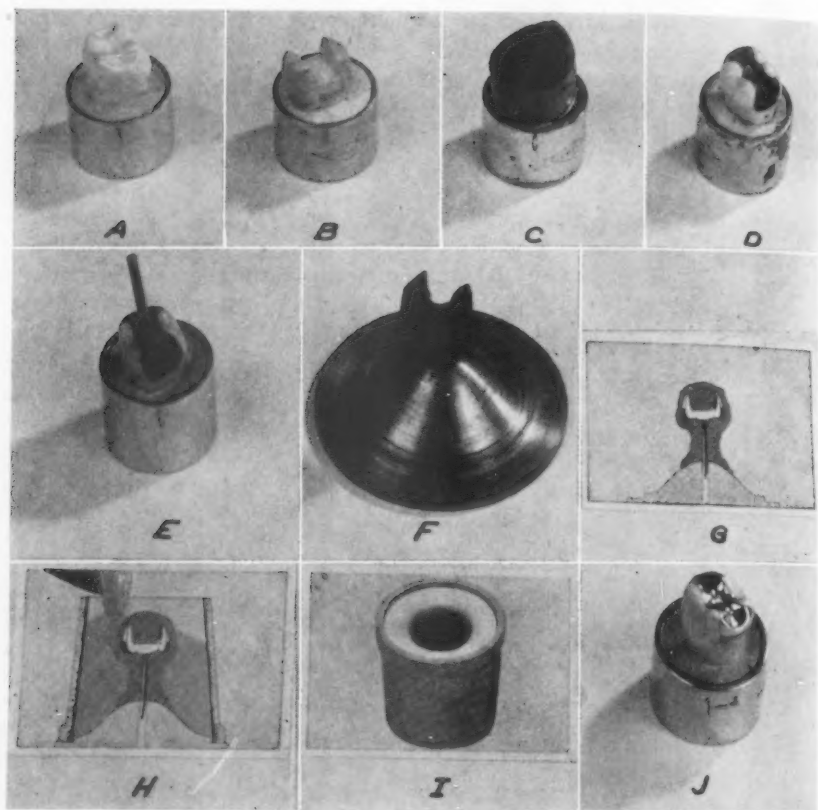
DENTAL TECHNIC FOR CASTING INLAYS. A—TOOTH IN NORMAL HEALTHY CONDITION. B—DECAYED TOOTH WITH ADJACENT TOOTH STRUCTURE REMOVED TO PROVIDE CAVITY CAPABLE OF HOLDING INLAY. C—COPPER BAND, CONTOURED TO FIT TOOTH SNUGLY, IS FILLED WITH SOFTENED INLAY WAX, PUSHED ONTO THE TOOTH AND HELD UNDER FINGER PRESSURE UNTIL THE WAX COOLS AND HARDENS. D—COPPER BAND IS SLIT AND REMOVED AND THE WAX IS CARVED UNTIL THE REMAINDER RESEMBLES ORIGINAL TOOTH STRUCTURE. E—WIRE OR PIN (SUCH AS 14 GAGE) IS HEATED AT ONE END AND INSERTED INTO PATTERN. AS THE PIN COOLS THE SURROUNDING WAX HARDENS AND HOLDS IT SECURELY. F—PATTERN IS LIFTED OFF THE TOOTH, USING THE PIN AS A HANDLE. IT IS INVERTED AND SET IN THE CRUCIBLE FORMER. G—PATTERN AND SPRUE IS PAINTED AND BUILT UP WITH A  $\frac{1}{8}$ -IN. THICKNESS OF INVESTMENT MIXED TO A CREAMY CONSISTENCY. H—A METAL RING OR FLASK IS SET ON THE CRUCIBLE FORMER SURROUNDING THE PAINTED PATTERN. THE RING IS FILLED WITH ADDITIONAL INVESTMENT. AFTER THE INVESTMENT SETS  $\frac{1}{2}$  HR. THE CRUCIBLE FORMER IS REMOVED AND THE WIRE PIN PULLED OUT, LEAVING A SPRUE HOLE LEADING TO THE PATTERN. I—THE RING OR FLASK IS PLACED IN FURNACE FOR  $\frac{1}{2}$  TO ONE HR. AND HEATED TO DULL RED HEAT ( $1200^{\circ}$  F.,  $650^{\circ}$  C.). THE WAX PATTERN VOLATILIZES AND DISAPPEARS, LEAVING A HOLLOW PATTERN CHAMBER. THE FLASK IS SET IN A CASTING MACHINE, METAL PLACED IN THE CRUCIBLE, MOLTEN AND FORCED INTO PATTERN CHAMBER THROUGH SPRUE HOLE. J—MOLD IS PLUNGED IN WATER, INVESTMENT REMOVED AND SPRUE CUT OFF. REMAINING CASTING IS READY TO BE CEMENTED IN TOOTH.
